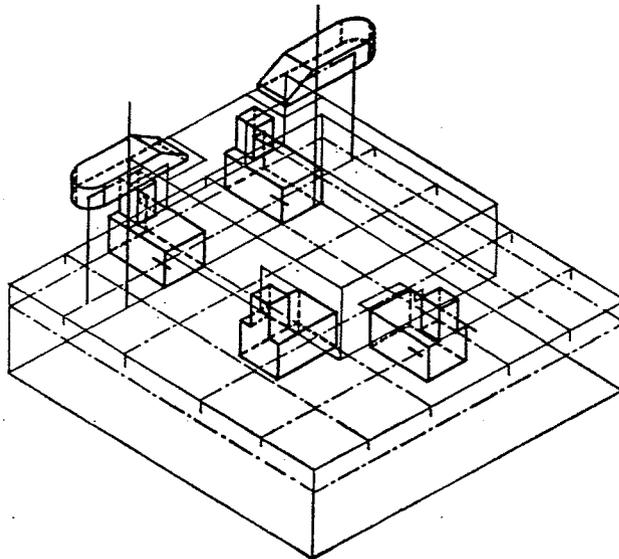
A complete workpiece clamping fixture surrounding the workpiece envelope surface
